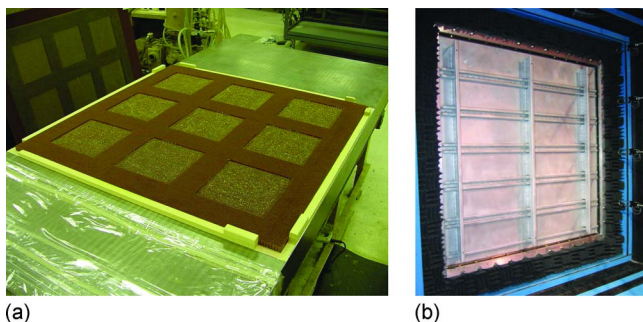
(Color online) Test panels: (a) Nomex core with 10 in. (25.4 cm) recesses and (b) stiffened aluminum panel in SALT test fixture.
